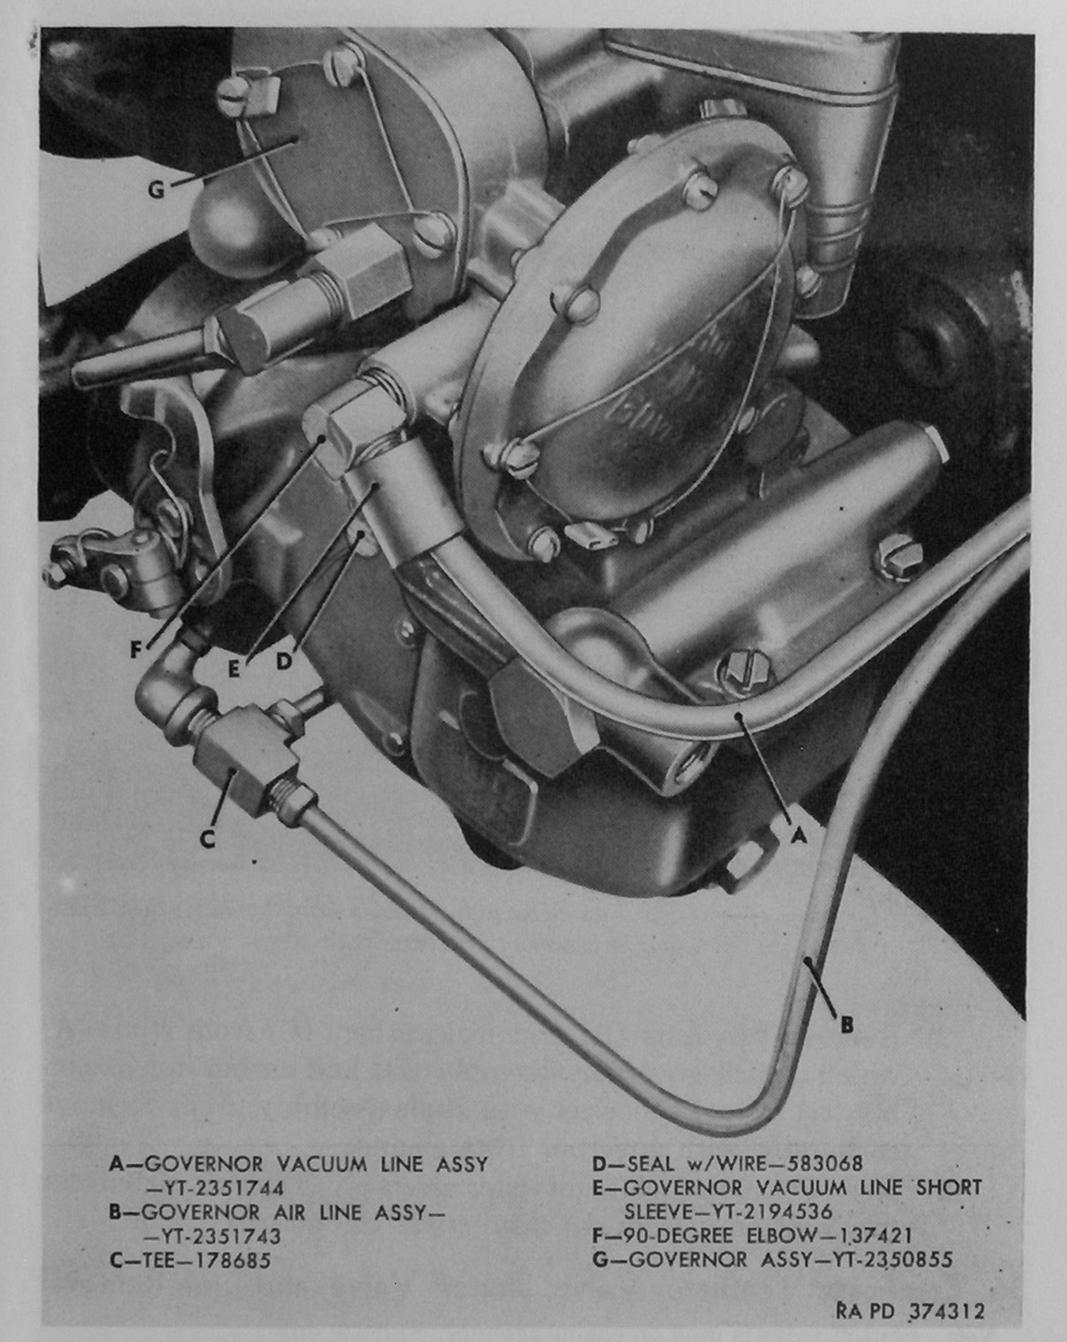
Governor line connections at carburetor and governor—engine assembly 8726920.
